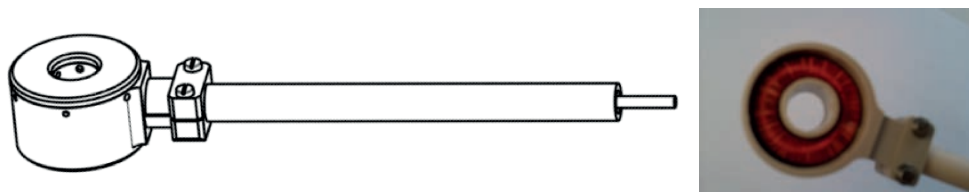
Left – CAD drawing of the miniaturized current probe. Right – A picture of the Rogowski coil wound around the ferrite core and assembled inside the Peek housing.
